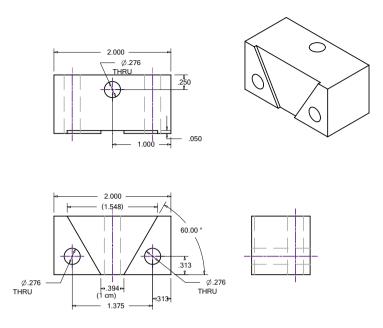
B2 Top and bottom acrylic clamp blocks. Two acrylic clamps required. All dimensions given in SAE (inches). Dimension at top of v-recess is a trivial result of the 60° angle. The bottom of the recess should accept the 1cm wide acrylic specimen.
